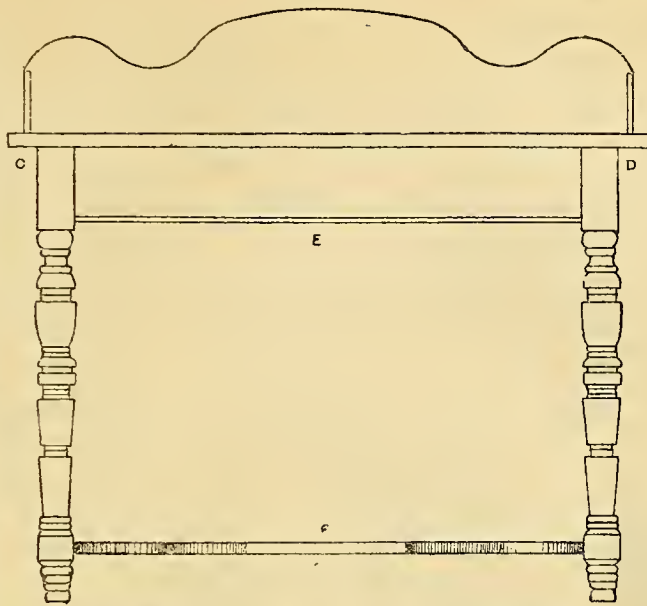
FRONT ELEVATION. Scale, 1 inch to 1 foot.
